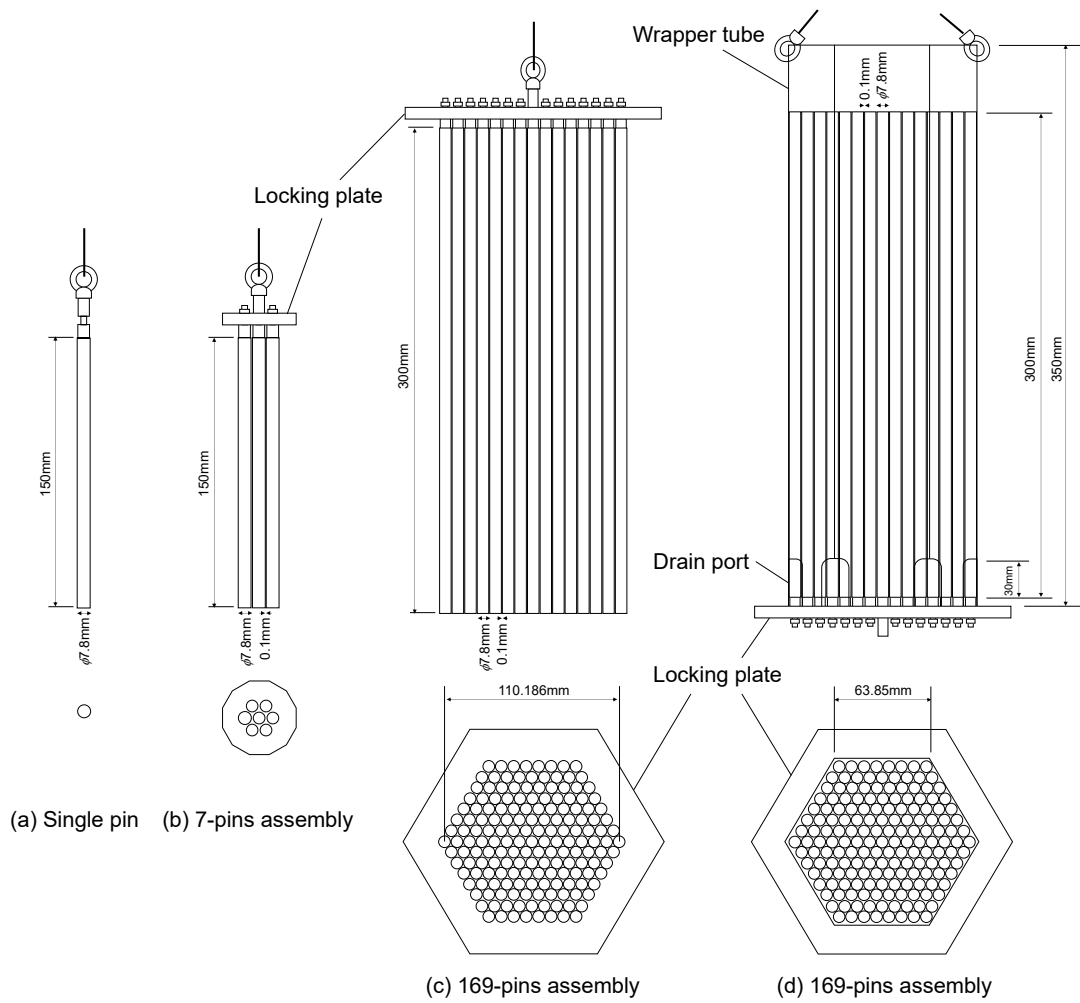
Test specimens of (a) Single pin, (b) 7-pin assembly and (c)–(d) 169-pin assembly.
